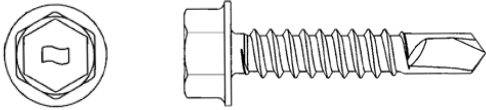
#10-16 INDENTED HIGH HEX WASHER HEAD TYPE 2 SCREW
